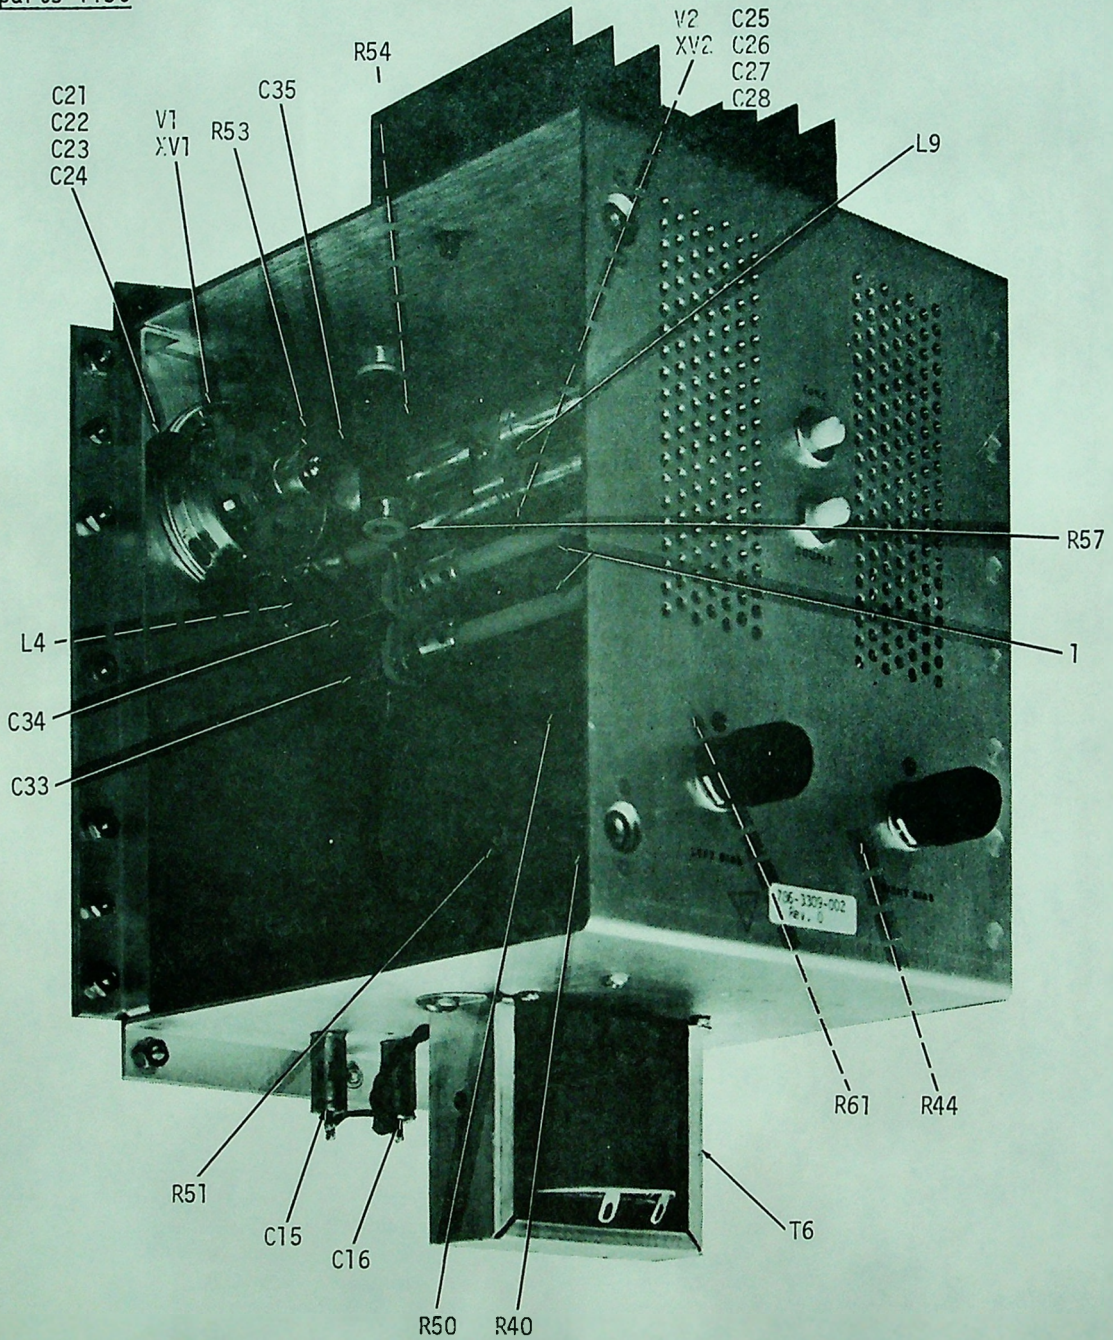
RF Driver Assembly, A11 (Sheet 2 of 2).
